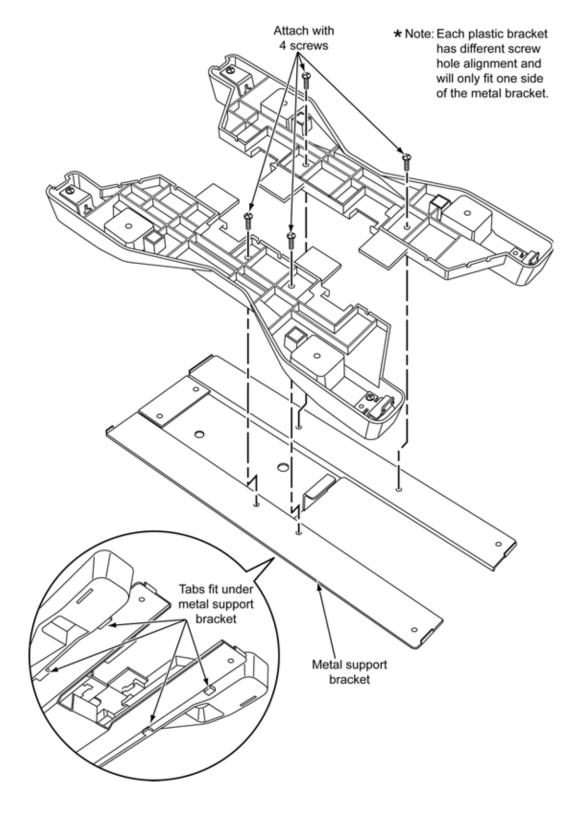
9.5" Mounting Brackets and Metal Expansion Fitting
